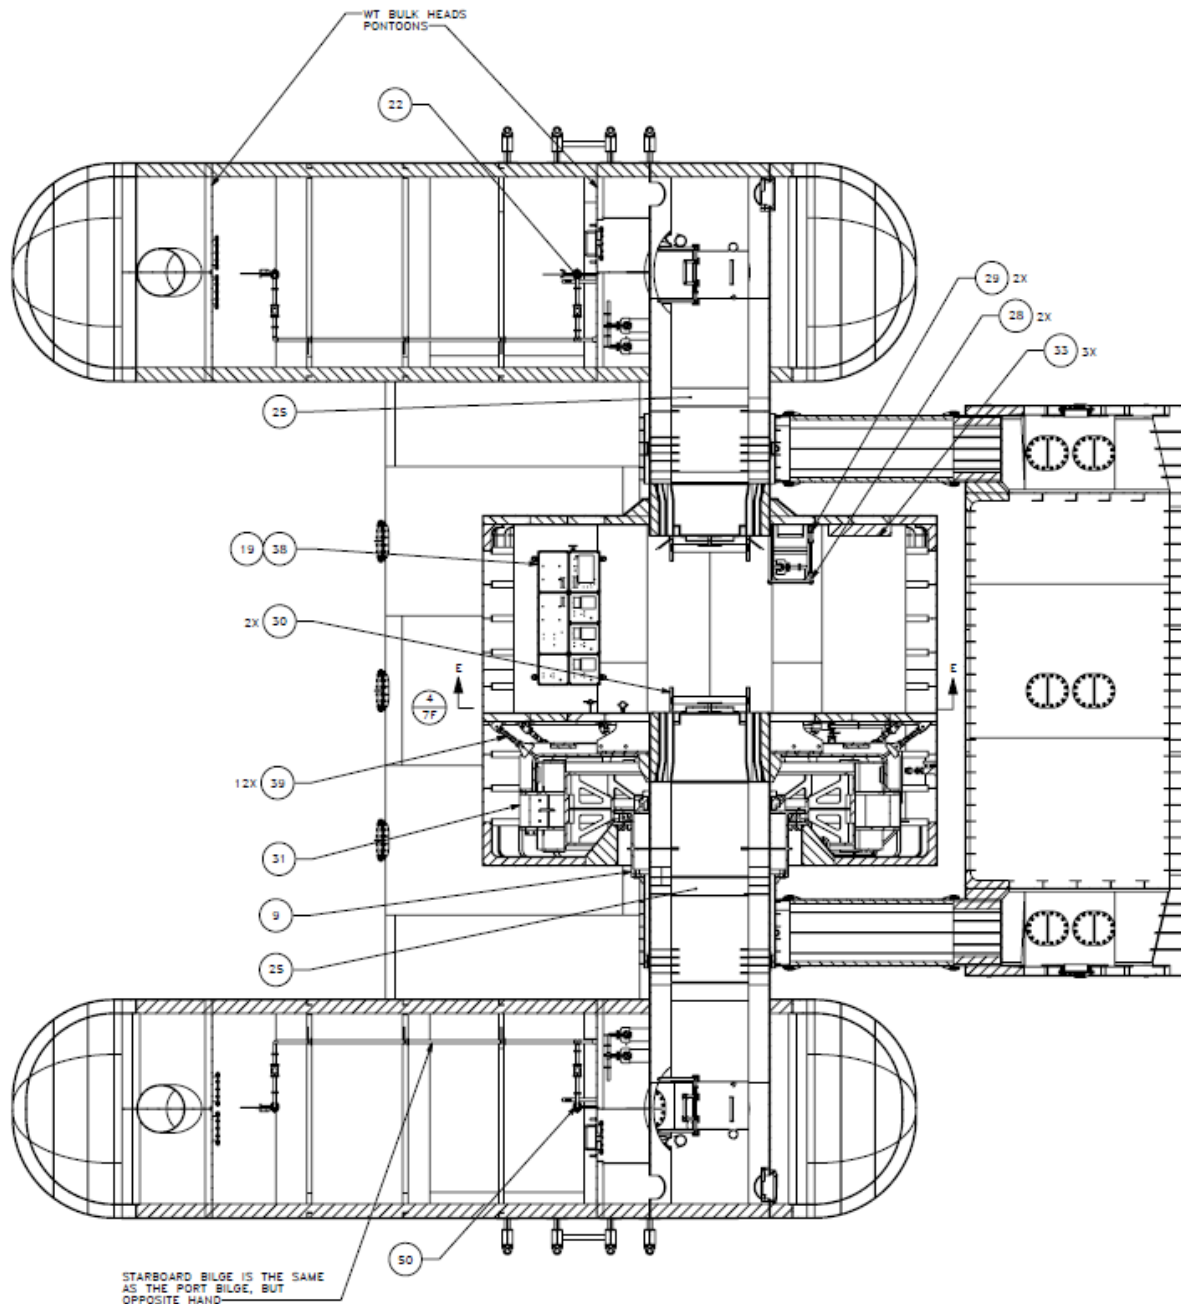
H3p sectioned at waterline, illustrative example of 2D drawing package.
